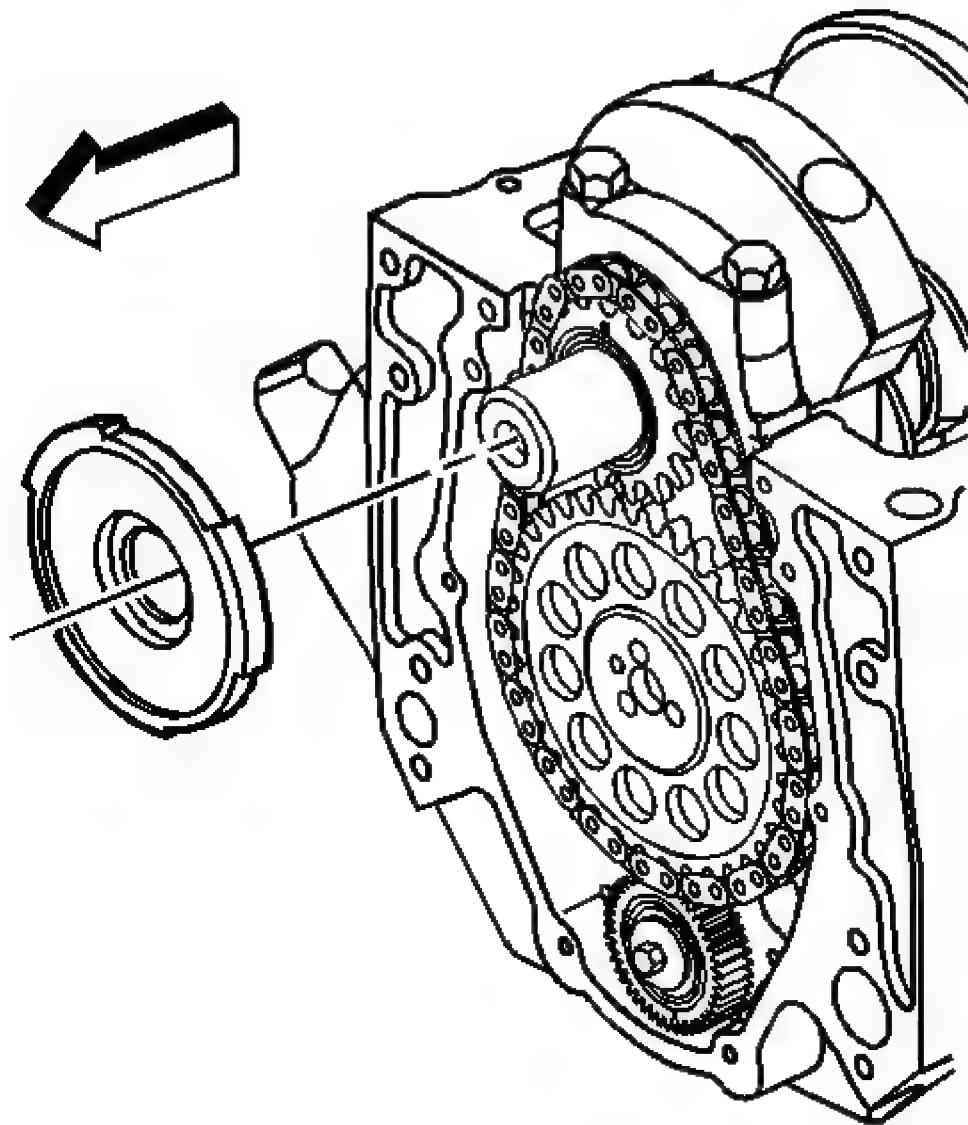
View Of Crankshaft Position Sensor Reluctor Ring
